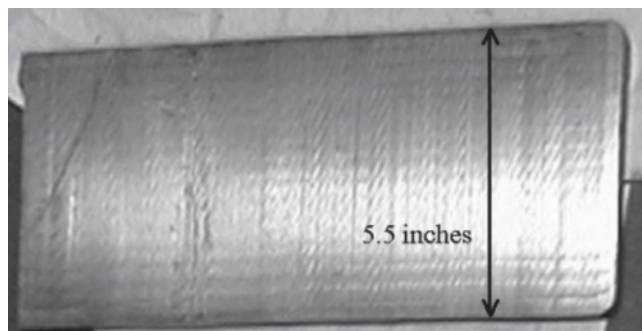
Unfinished surface of a TiAl target plate cut from a casting.
